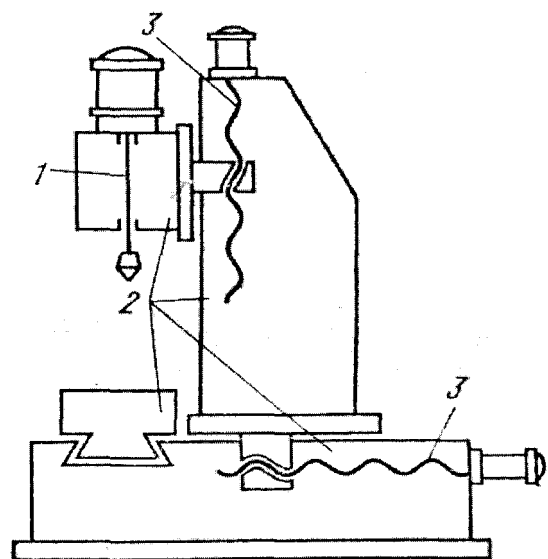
Datum Node (assembly units) of the machine tool: 1 – main assembly, 2- basic parts, 3 – feeding device
